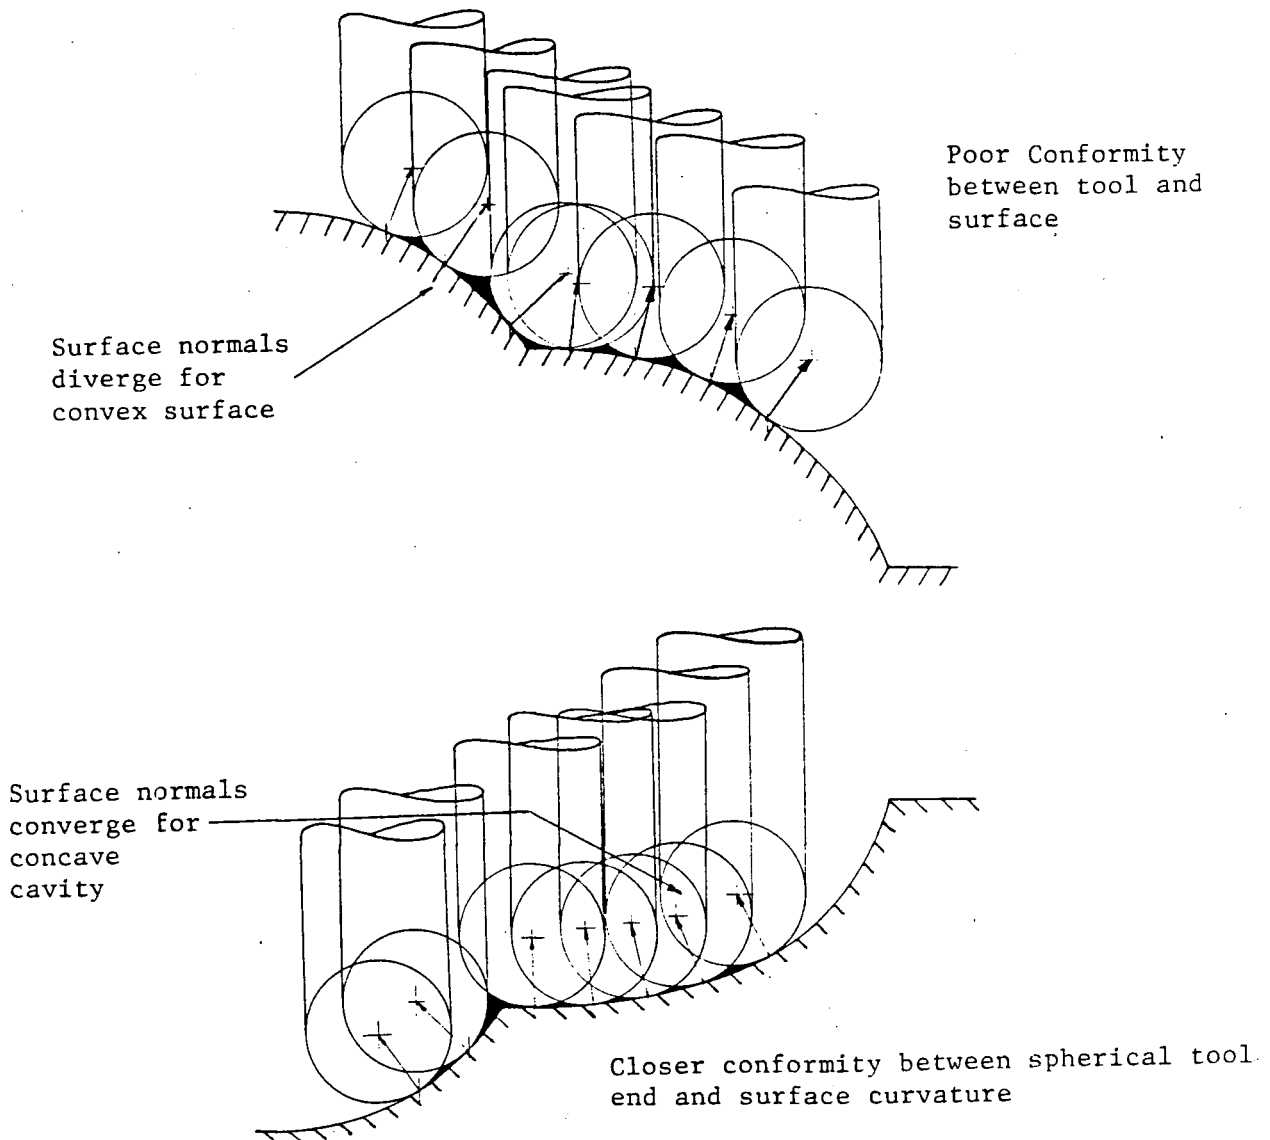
Closer conformity of spherically-ended milling cutter to die-surface curvatures gives better surface-finish when machining the female cavity
